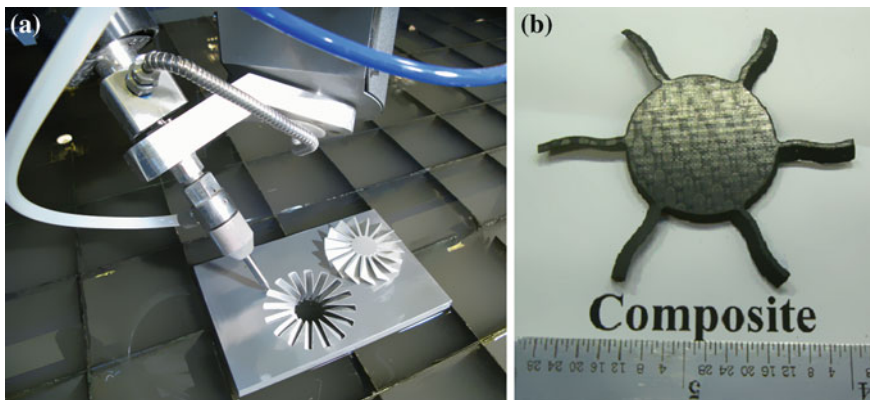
a Multi-axis machining operation [wardjet.com] and b machined composite sample [11]
